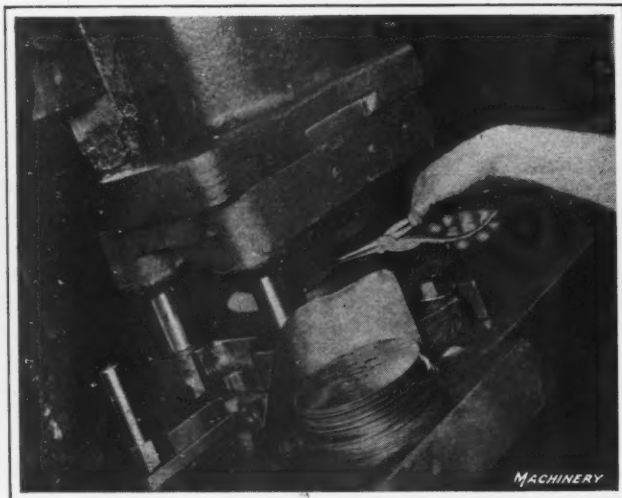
Inclined Power Press set up with Sub-press Dies for slotting Rotor Stampings
